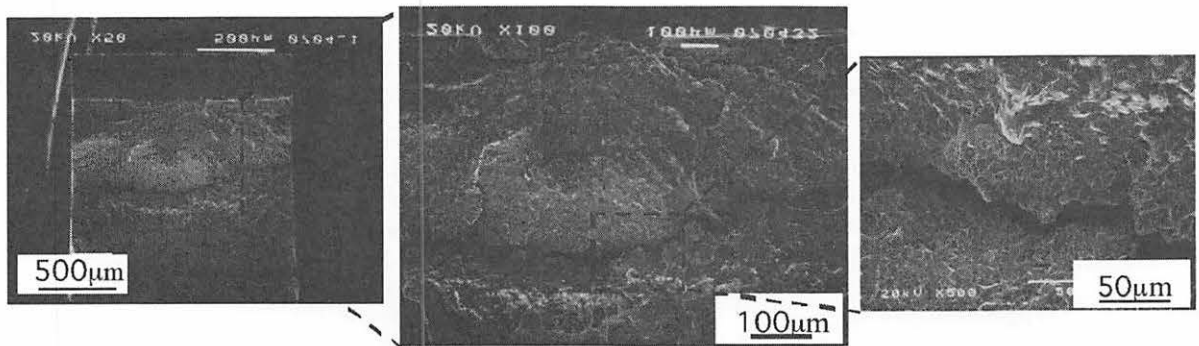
The typical fracture surfaces for the He-implanted Charpy impact specimen of the 14Cr-ODS steel tested at -146°C .
